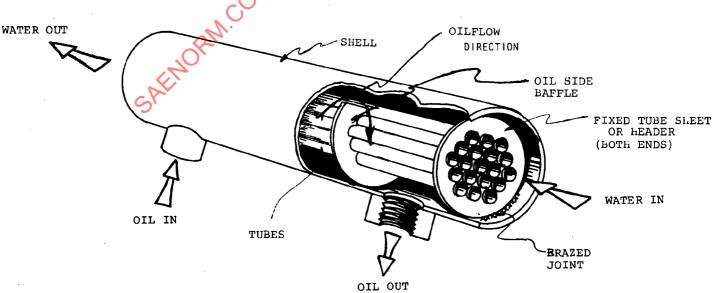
SHELL AND TUBE OIL TO WATER COOLER-FIXED BUNDLE
